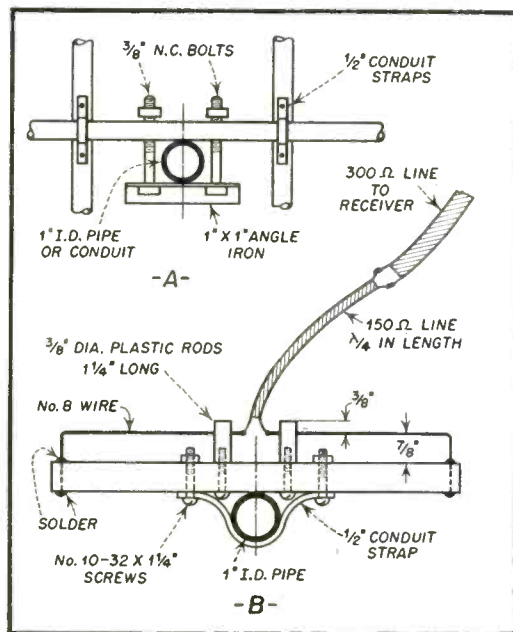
A. Top view, showing mounting of antenna on the mast and element mounting. Fig. 10B. Constructional details of folded dipole driving the Yagi.
